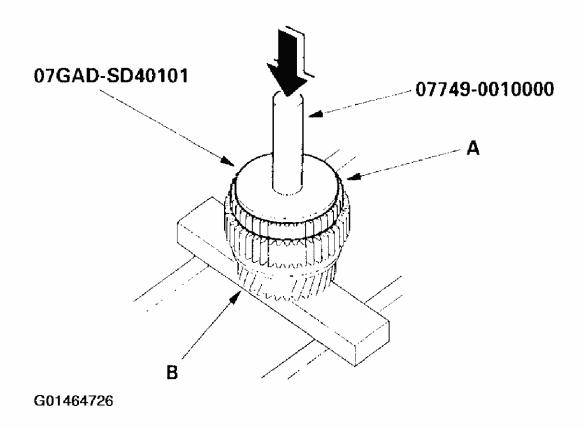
Installing The 1st-Hold Clutch Hub In The 1st Gear Courtesy of AMERICAN HONDA MOTOR CO., INC.
